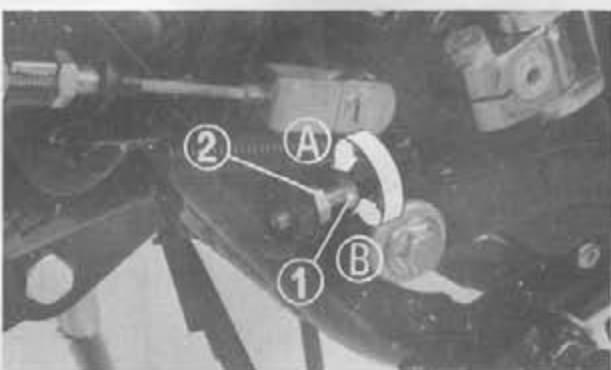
(1) Adjusting bolt (2) Lock nut
